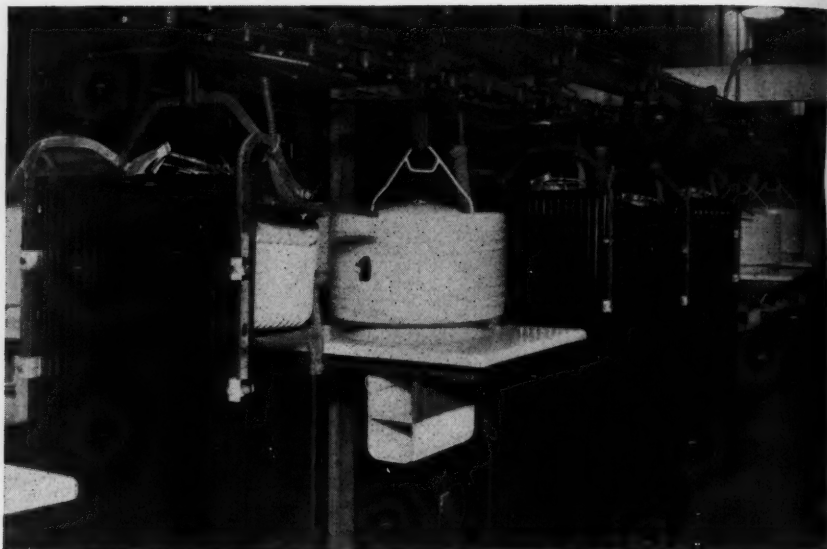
Each finished unit is given a "running" test while it is being conveyed from the unit assembly to the final assembly.
